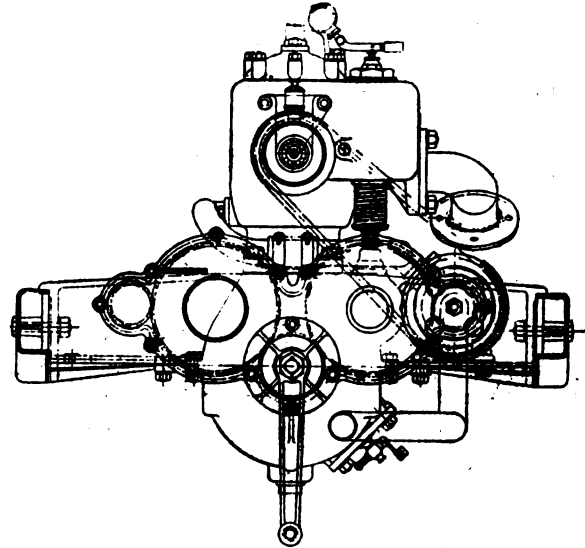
Front Elevation of "Sheffield-Simplex" 45-h.p. Six-Cylinder Engine.
